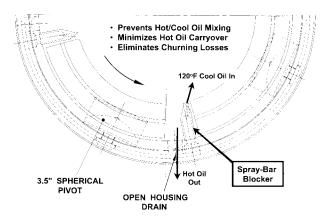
16,000 HP Pinion Bearing, Lower Half with Conventional Spray Bars.
